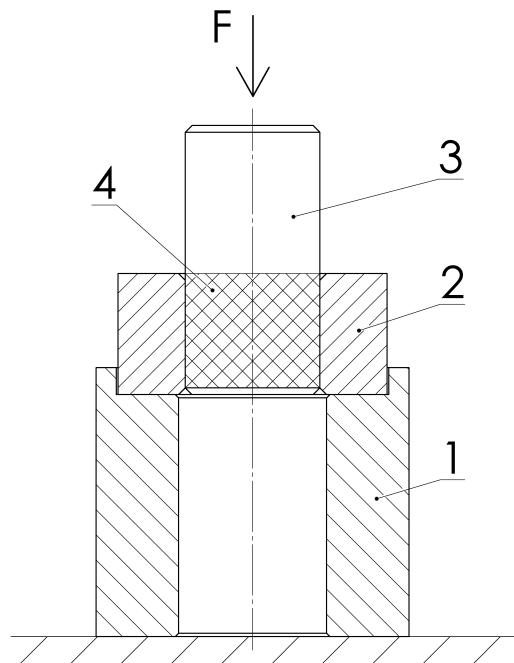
Testing assembly; 1-specimen support, 2-collar, 3-pin, 4-adhesive coated area (according to EN 15337)
